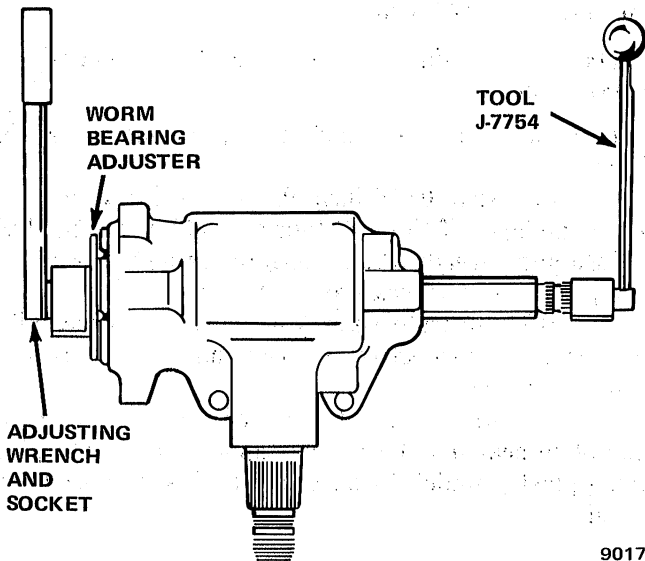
K-16 Adjusting Worm Bearing Preload Torque
